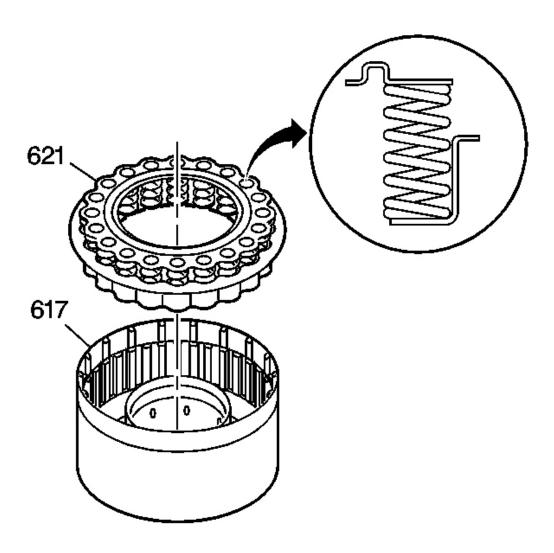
View Of Second Clutch Spring Assembly Courtesy of GENERAL MOTORS CORP.
